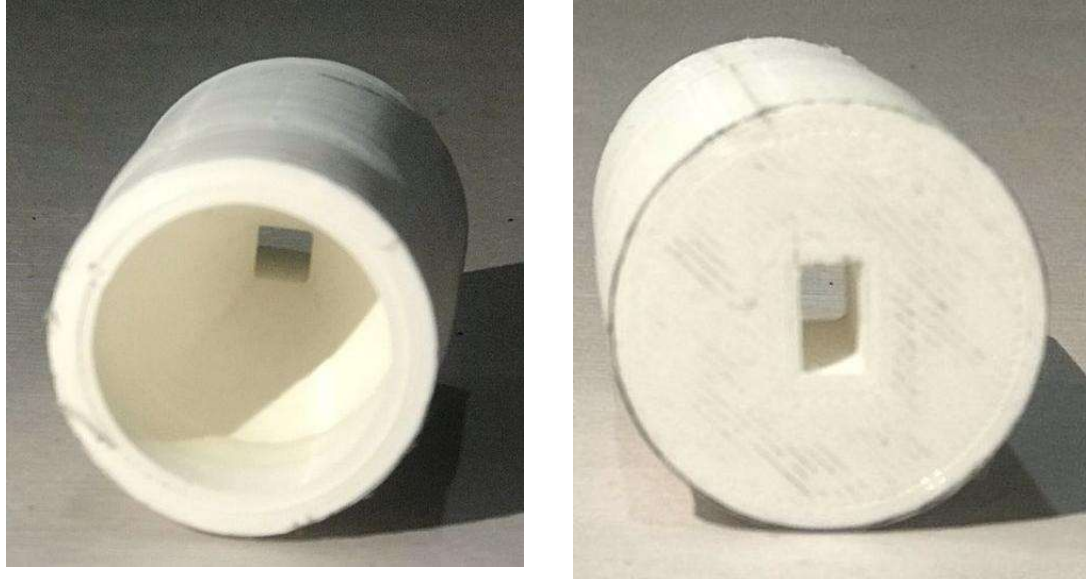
3 D printed nozzle showing the inlet section and exit section
